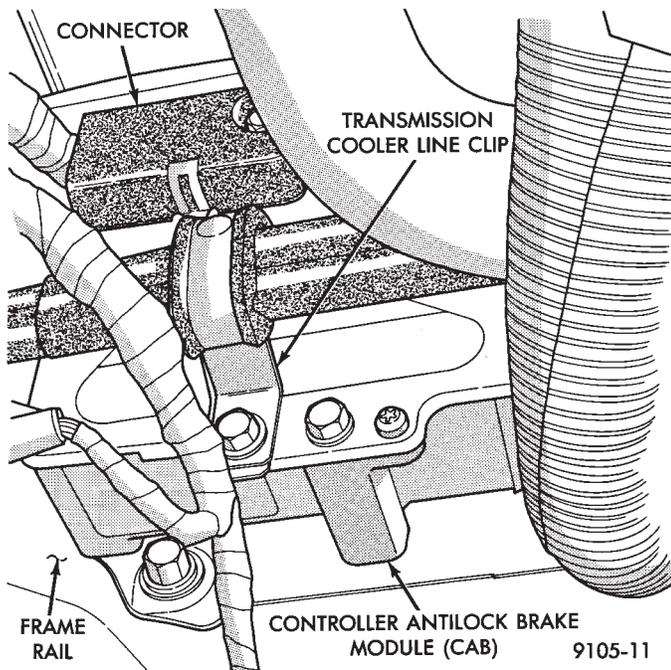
Location Controller Anti-Lock Brake (CAB)
